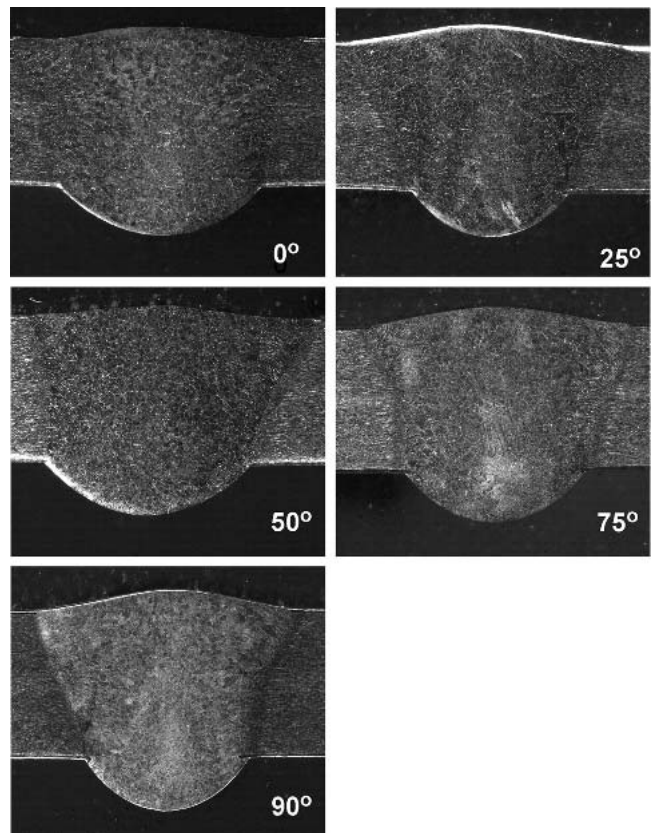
Macroscopic photos of a cross-sectional view of the weld bead made with different groove angles
